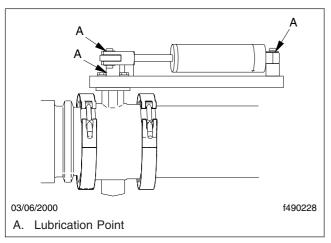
, Pacbrake Exhaust Brake and Air Cylinder
